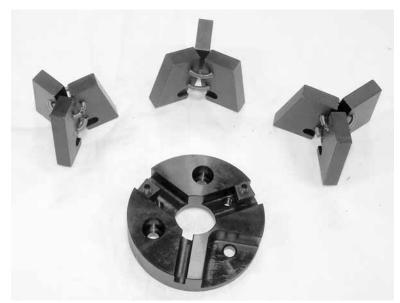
An optional extender kit includes a larger tool head and 3 leg sets for I.D. up to 3.0" (76.2 mm) and O.D. up to 3.25" (82.6 mm).
